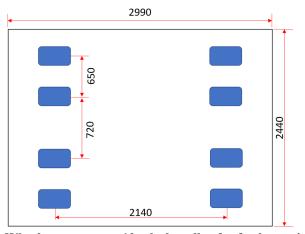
Wheel arrangement 10 t deck trolley for food container.
